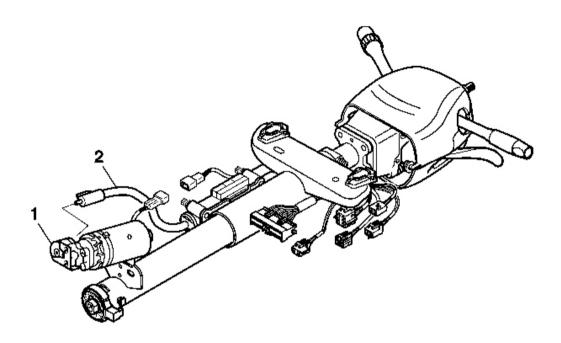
Cable Assembly & Telescope Drive Motor Assembly Courtesy of GENERAL MOTORS CORP.
